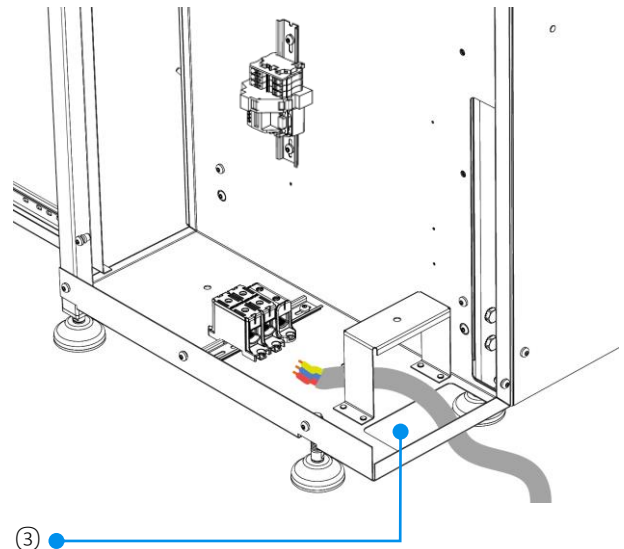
Illustration of routing for external cables in a rack solution (displayed with complete BMS back/side plate removed)
